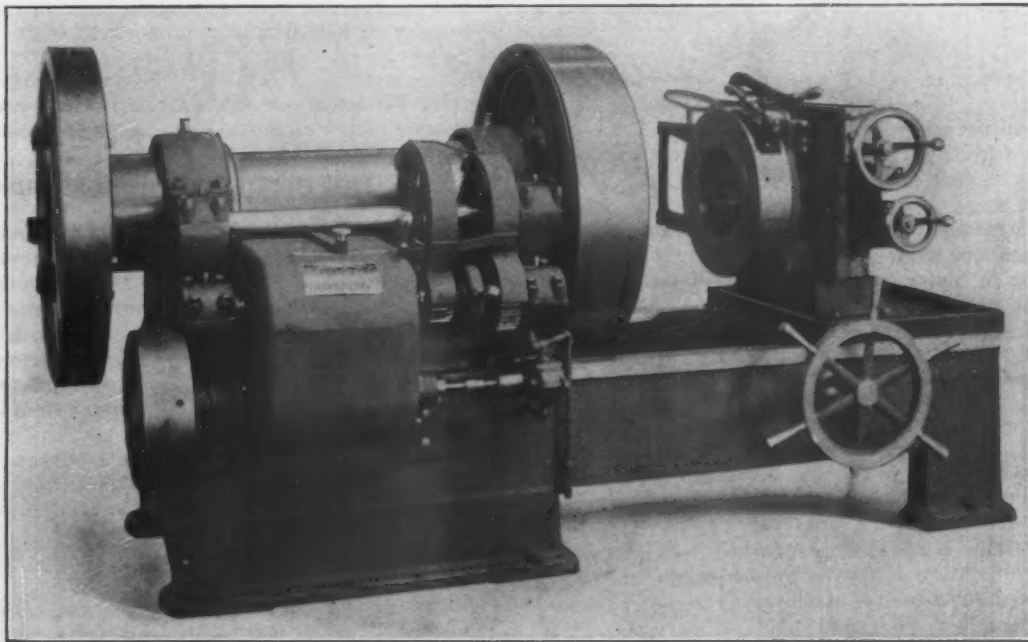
The No. 8 (1909 Model) Pipe Threading and Cutting Off Machine Built by the Stoever Foundry & Mfg. Company, Myerstown, Pa.
